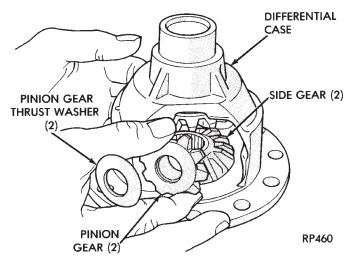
Remove or Install Pinion Gears, Side Gears, and Tabbed Thrust Washers, by Rotating Pinion Gears to Opening in Differential Case
